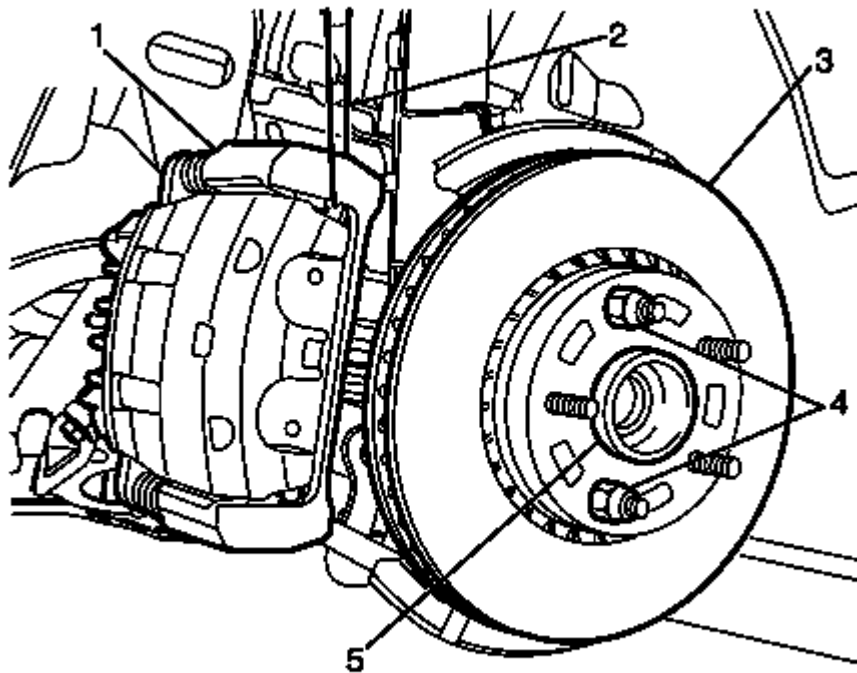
View Of Hub, Wheel Nuts, Front Brake Disc, Heavy Mechanic's Wire & Front Brake Caliper
